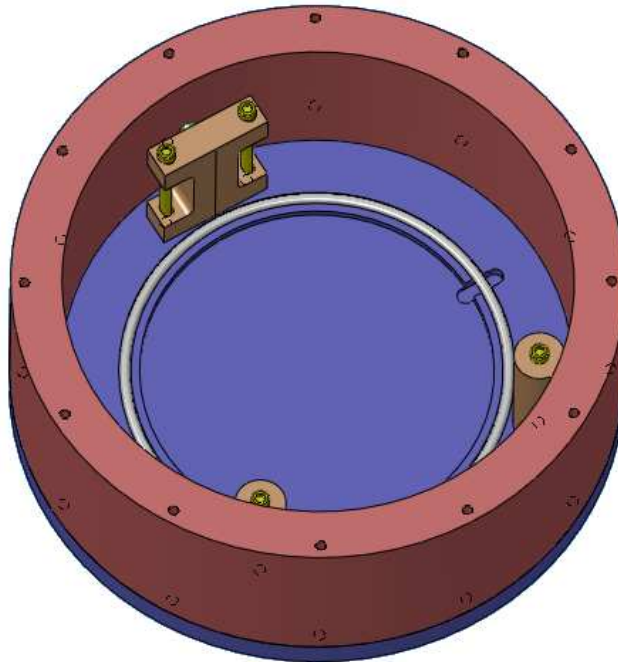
Remove the cap, large o-ring, and one small o-ring.
